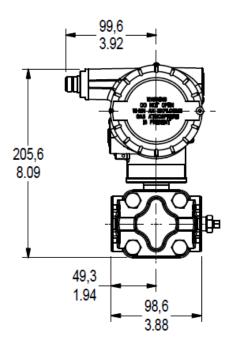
Dual Head Gauge, typical mounting dimensions for STGW740, STGW770 (remote antenna adaptor shown, rear view)
